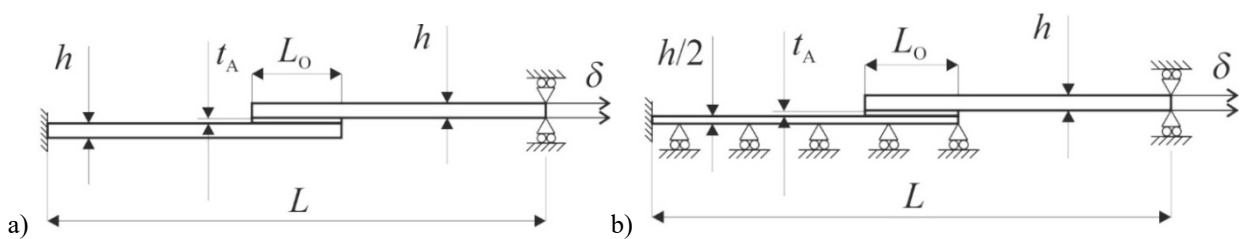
Geometry and dimensions of the single (a) and double-lap joint (b).
